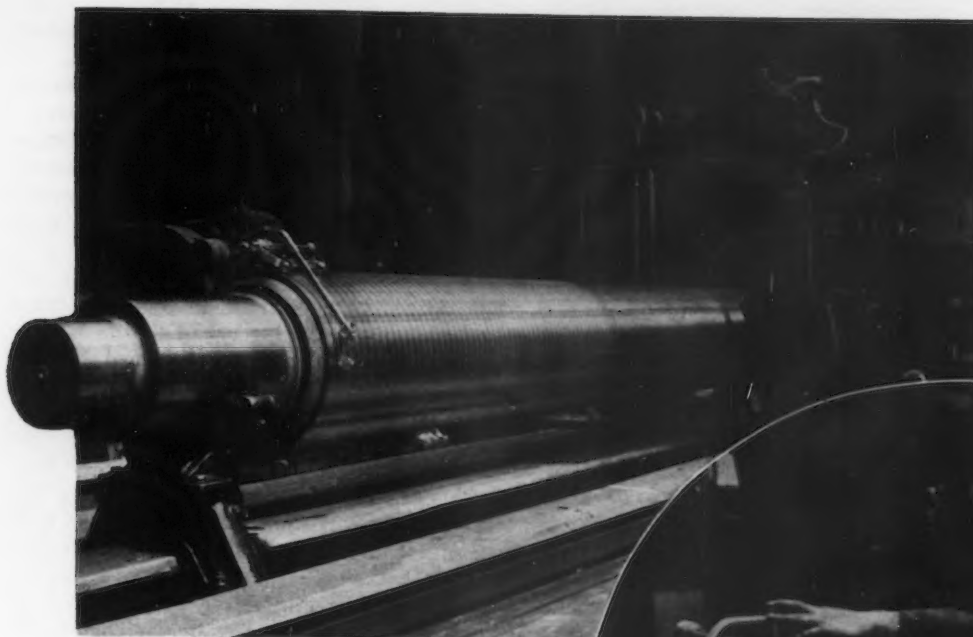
(Left) Open Bearings Support the Roll in the Grinder, for Its Great Weight Holds It in Place. The caliper gives readings of diameter as the work progresses
